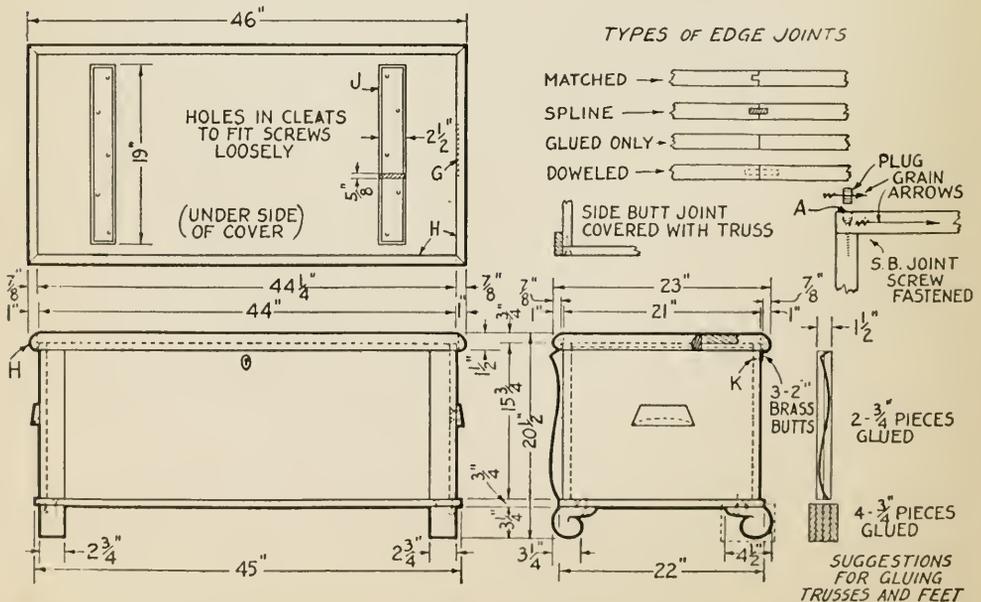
Colonial chest with various types of edge joints—matched, splined, butted and glued, doweled, and two kinds of side-butteted and screwed joints. Any of these can be used, of course, in making any types of chest.
